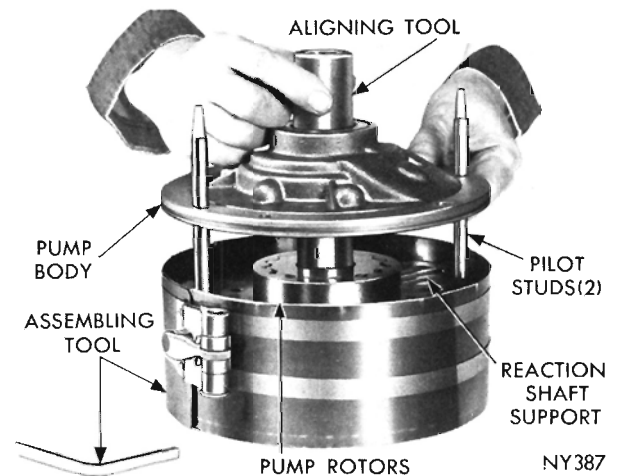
Assembling Pump and Reaction Shaft Support (A-904)
